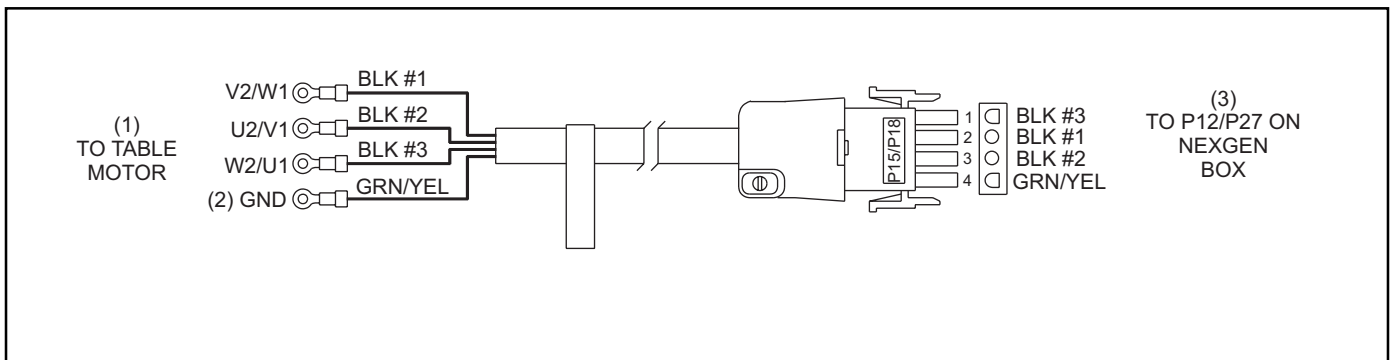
External Table Motor Cable Assembly (Part No. 47-142615-000)
